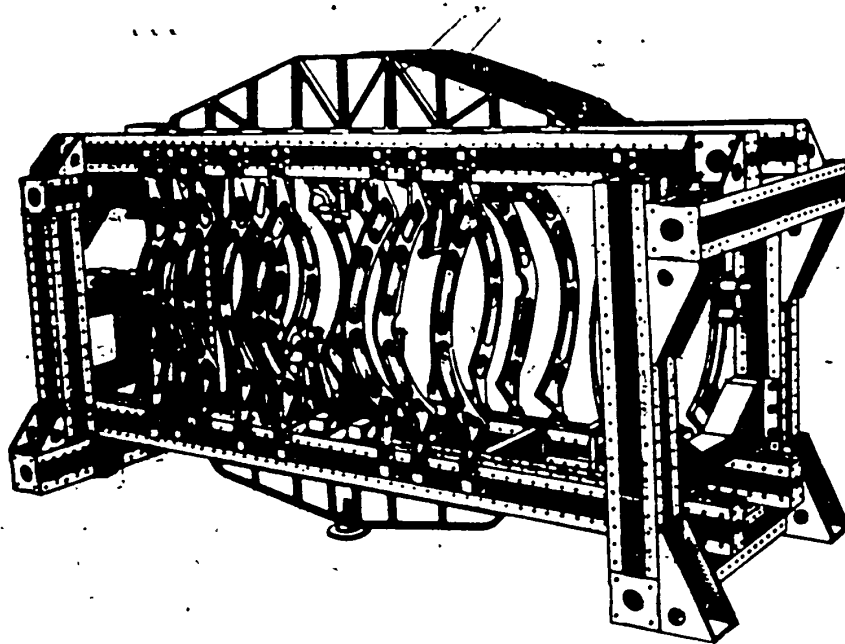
Typical Design of a Jig for Assembling, Drilling, and Riveting of a Fuselage
